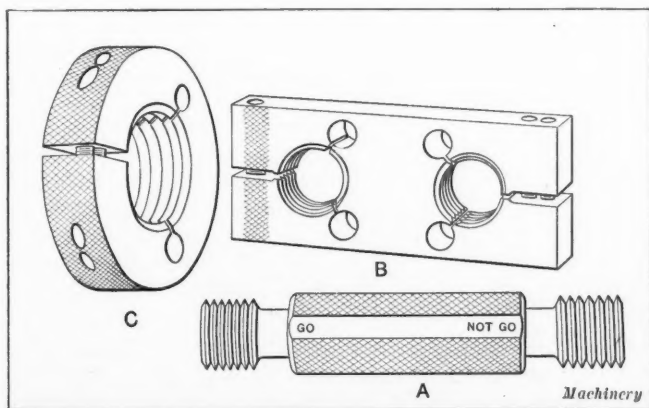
Limit Working and Inspection Plug and Templet Screw Gages
